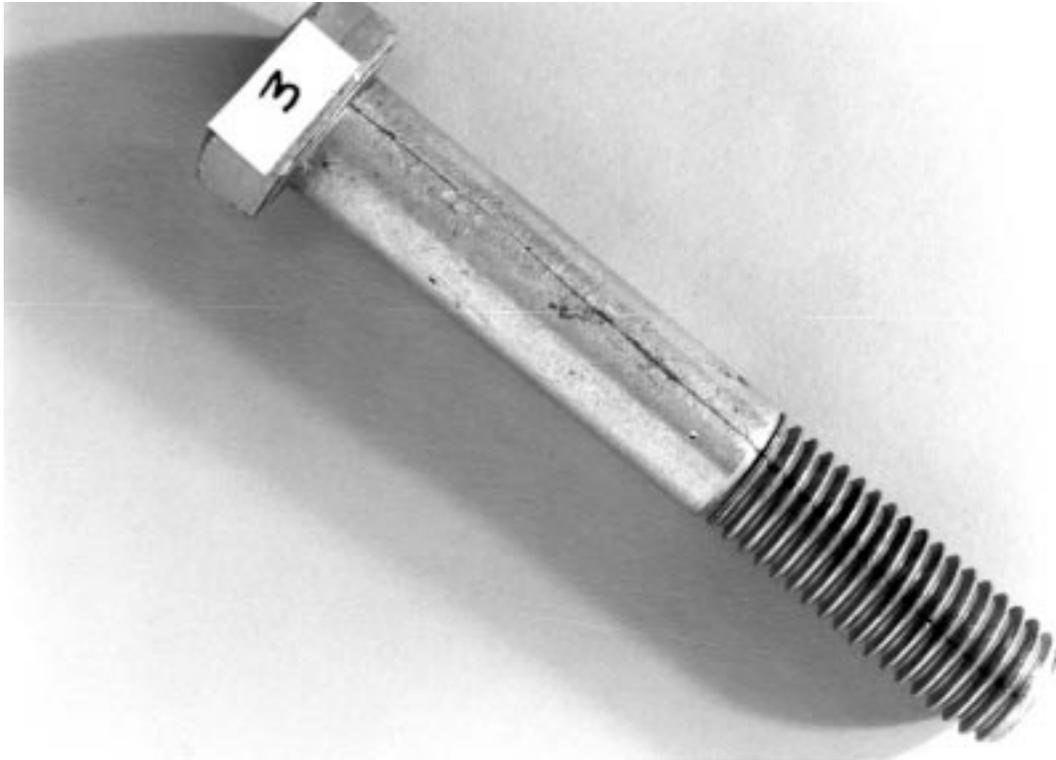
Longitudinal cracks in stacking fixture bolts.
